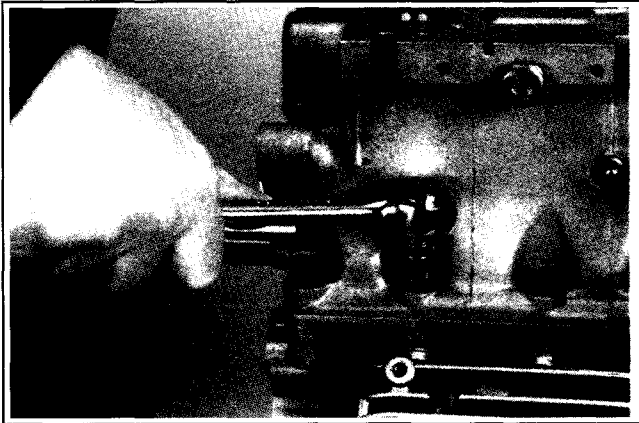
Removing the M8x40 mm Hex. Flange Screws.
